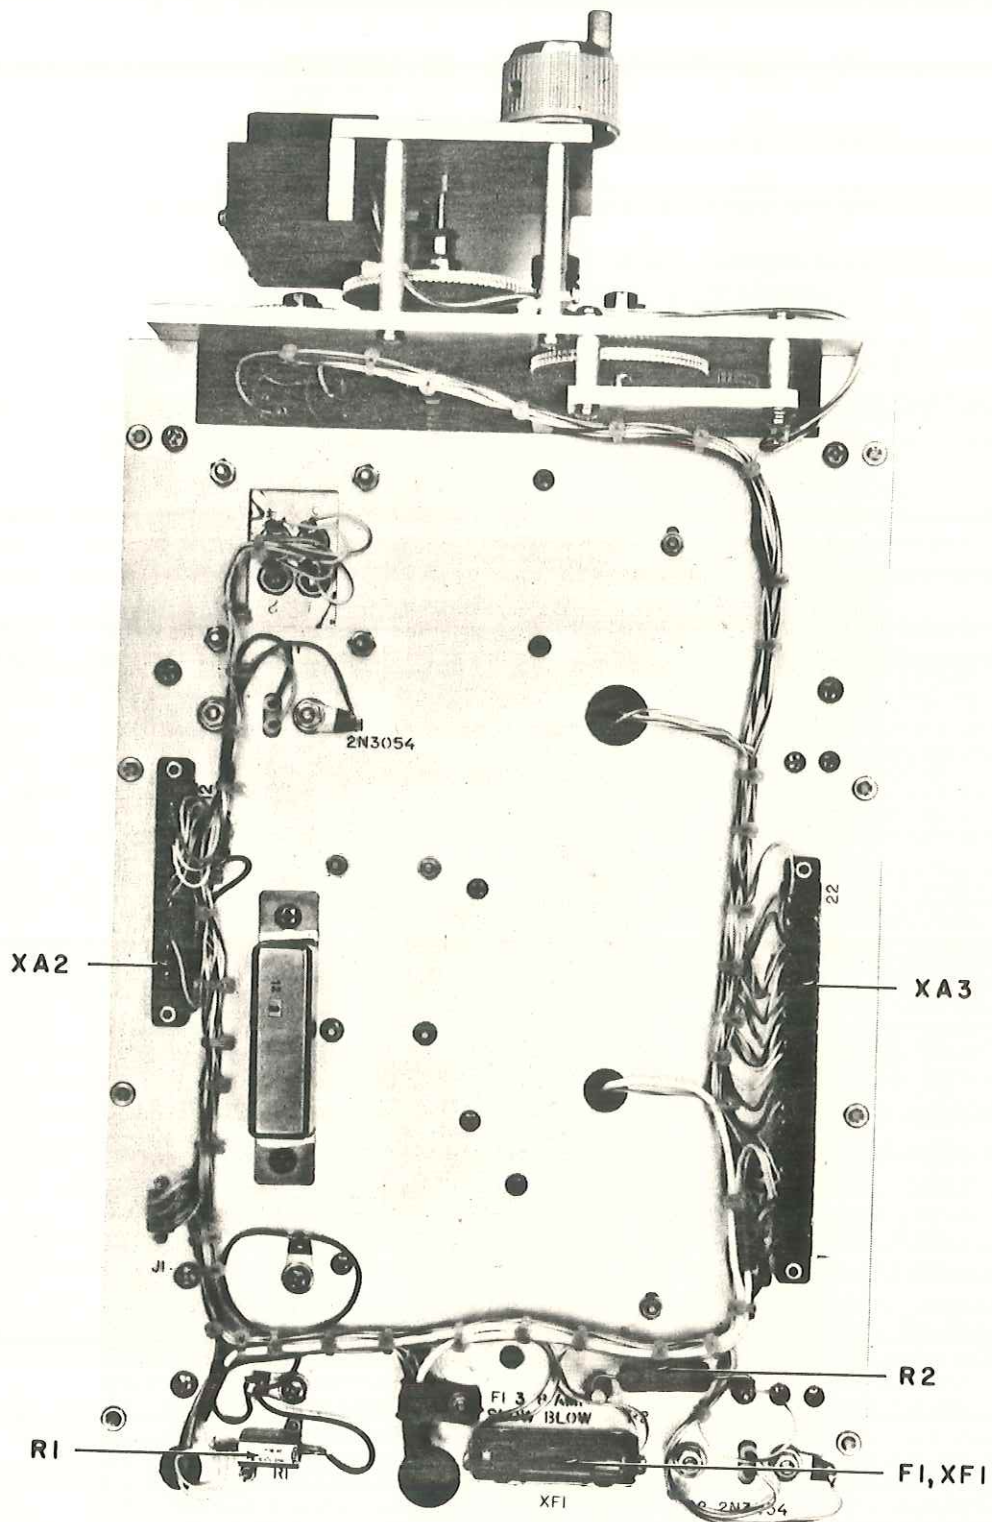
Type TH-245B Tuning Head, Bottom View, Location of Components
